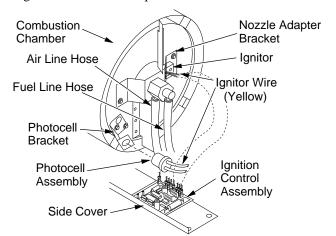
Disconnecting Ignitor Wires from Ignition Control Assembly
